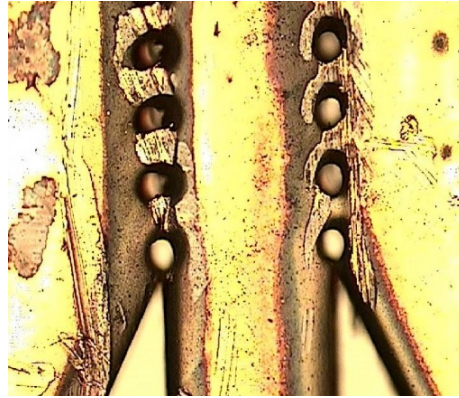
Surface contains cracks and holes after the electroplating process
